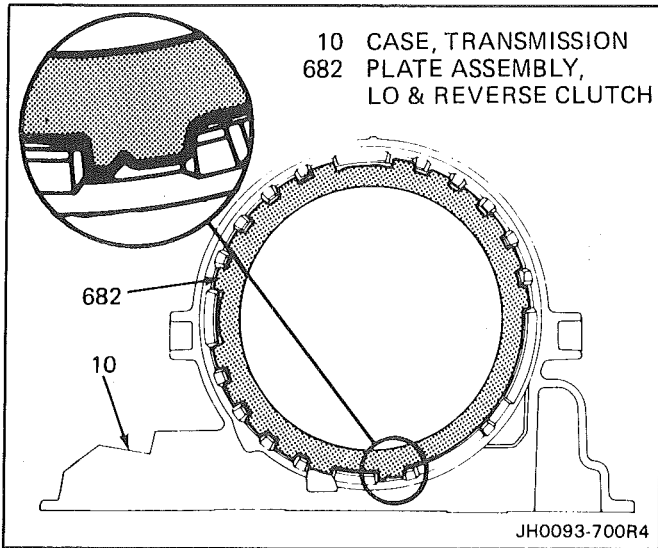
Lo and Reverse Clutch Plates Properly Installed
